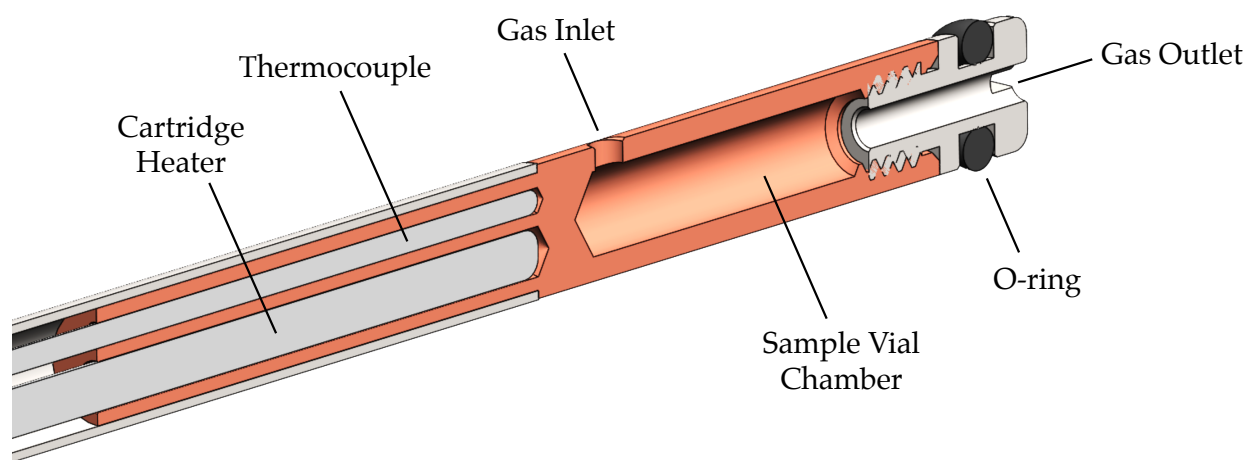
Sample probe for heating low-vapor pressure solids and liquids. Gray colored material is stainless steel and the bronze color is copper, which provides good heat transfer. The O-ring near the end makes a seal with the tubing so that gas must flow into the inlet, around the sample vial, and then through the gas outlet, which ensures good sample pickup into the carrier gas flow.
